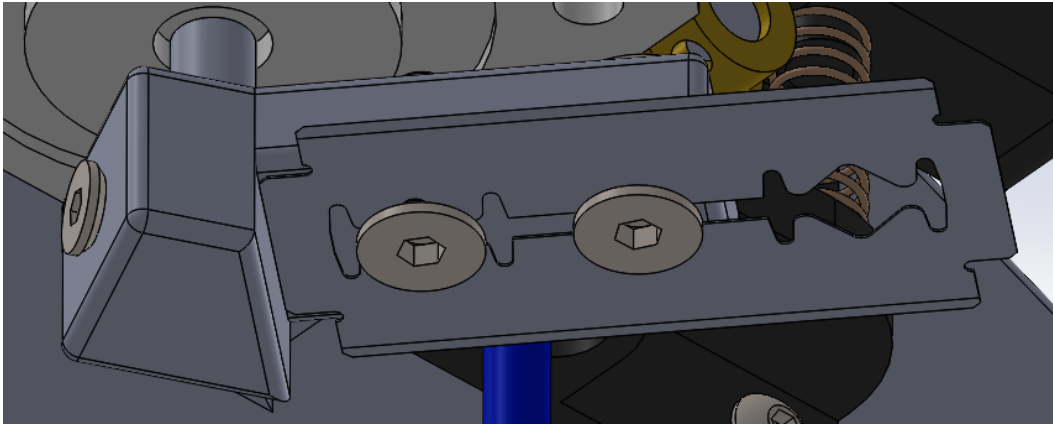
Cutter arm with the razor blade attached and bolts for the razor blade and cutter arm.
